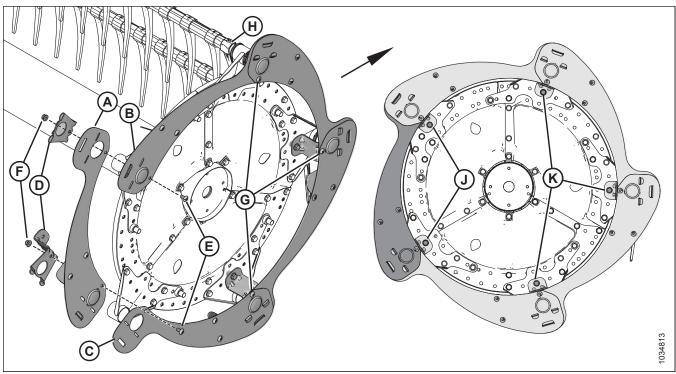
Five-Bat Reel – Assembled Reel Endshields on Reel
